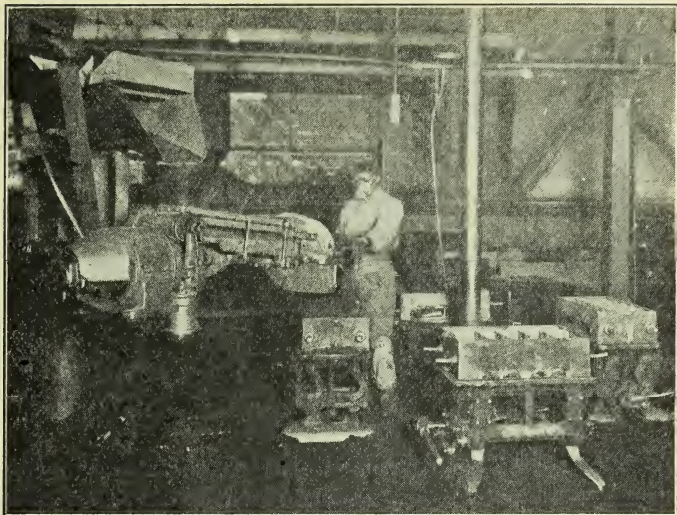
AN EXPERIMENTAL MOLDING MACHINE THAT IS DESIGNED TO ELIMINATE HAND RAMMING IN WHICH THE SAND IS PACKED BY BEING THROWN INTO THE MOLD AT A HIGH VELOCITY FROM THE PERIPHERY OF A REVOLVING WHEEL
